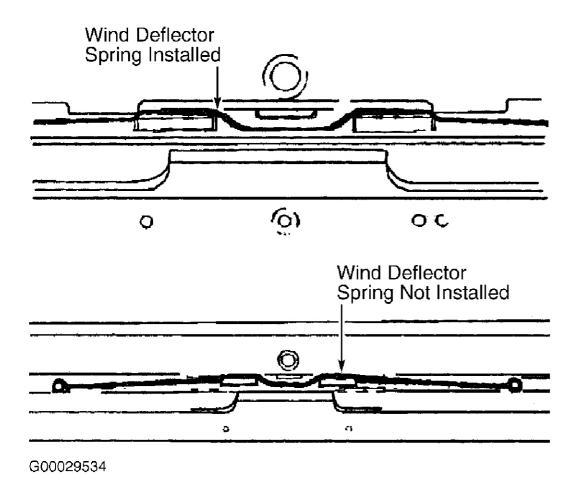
Removing & Installing Wind Deflector Spring Courtesy of GENERAL MOTORS CORP.
